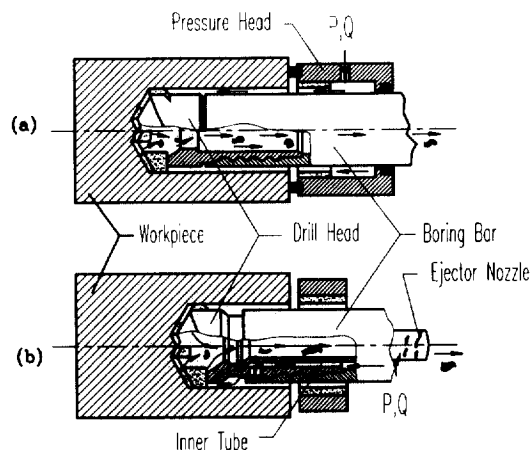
BTA (a) and ejector (b) deep-hole drilling.
